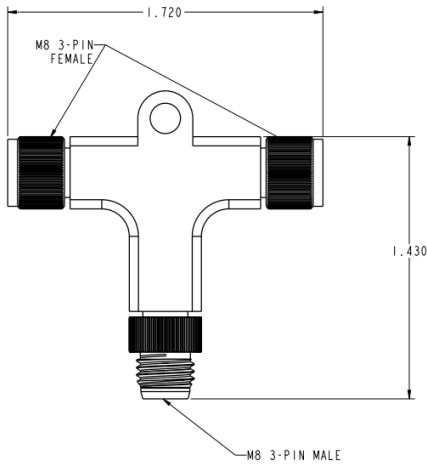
DUAL SPLITTER MOUNTING DIMENSIONS
